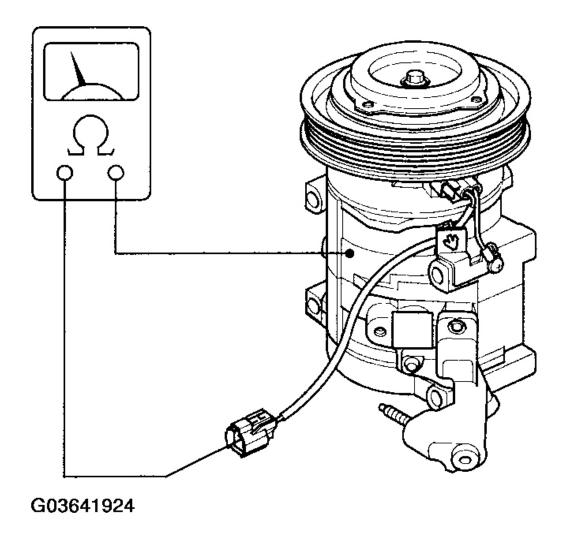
Checking Resistance Of Field Coil Courtesy of AMERICAN HONDA MOTOR CO., INC.
